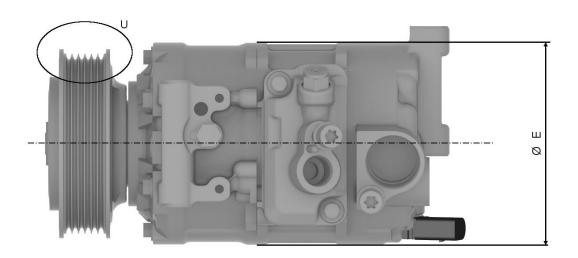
Connection dimensions of air conditioner compressor (front view)
